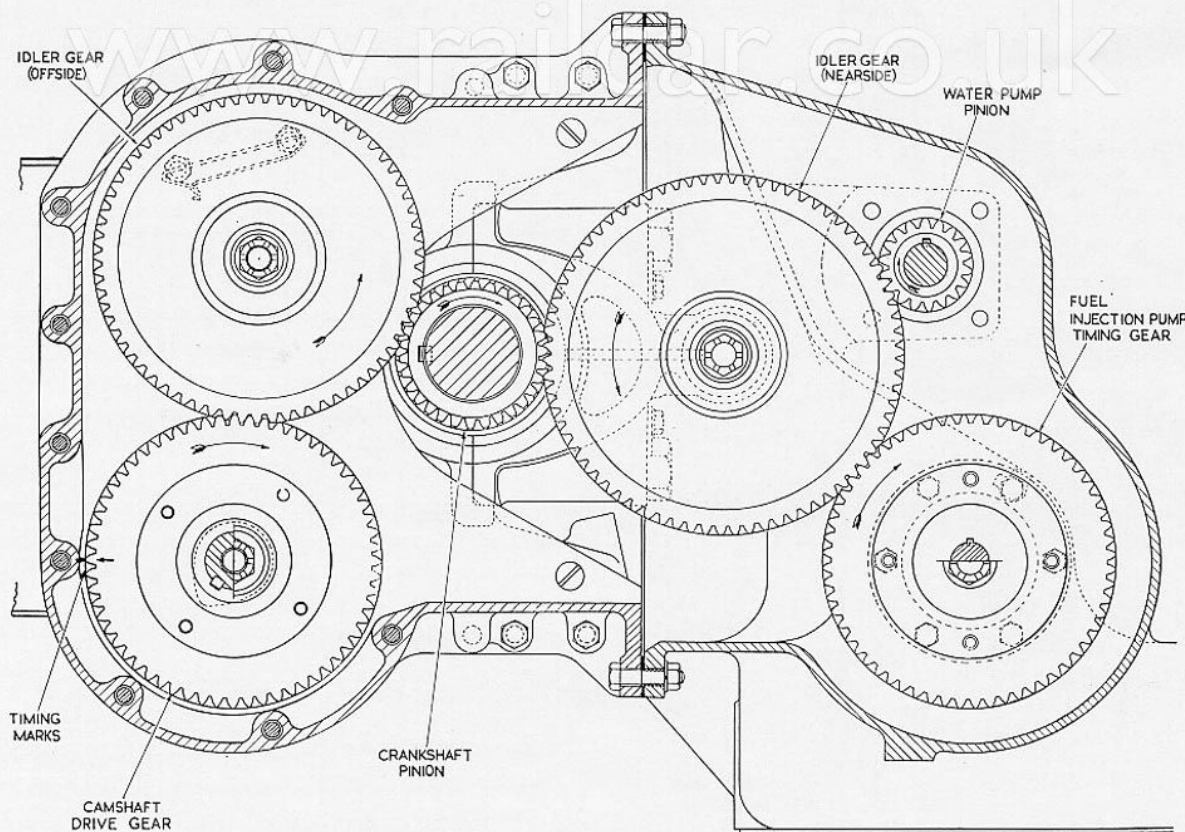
ARRANGEMENT OF TIMING GEARS (HORIZONTAL ENGINE)
